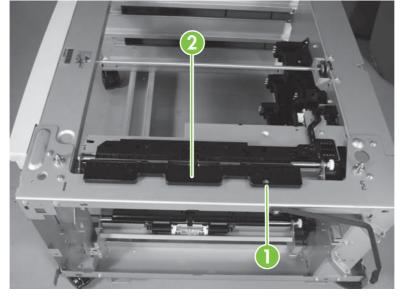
Remove the pickup unit (upper cassette) (1 of 3)
